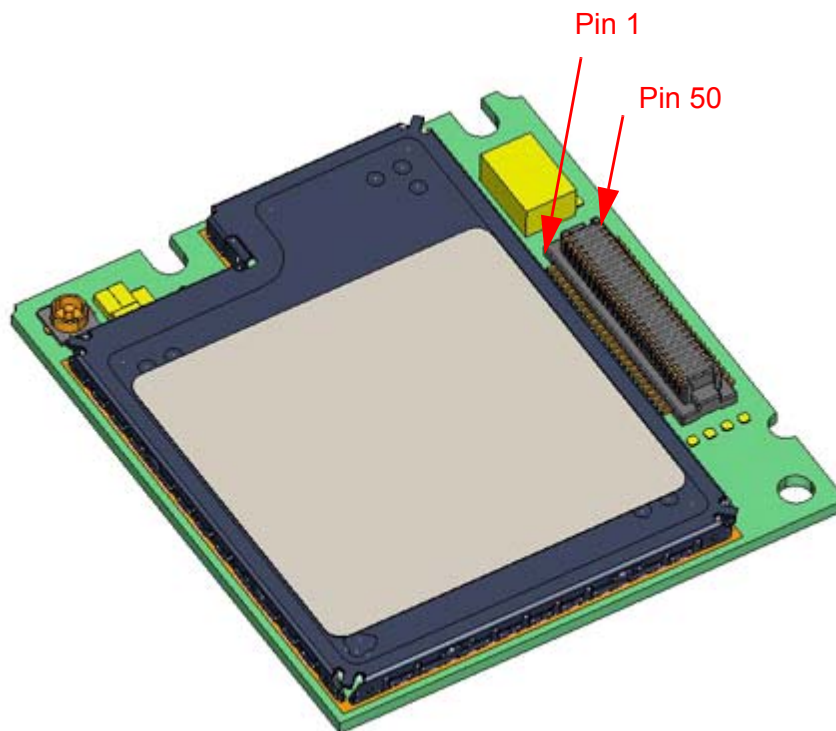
(#) shows the top view on MC52i and provides an overview of the mechanical dimensions of the board. For further details see [Figure 35](#).
